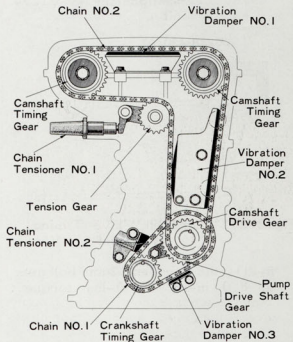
Chains, Gears & Y5197 Vibration Damper Construction
